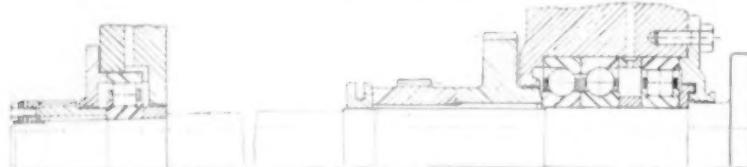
Arrangement of ball- and roller-bearing lathe headstock.
